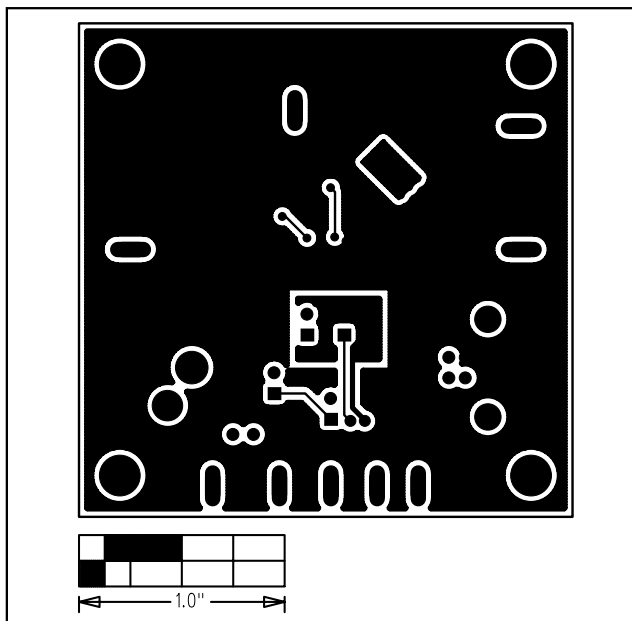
MAX1874 EV Kit PC Board Layout—Solder Side
